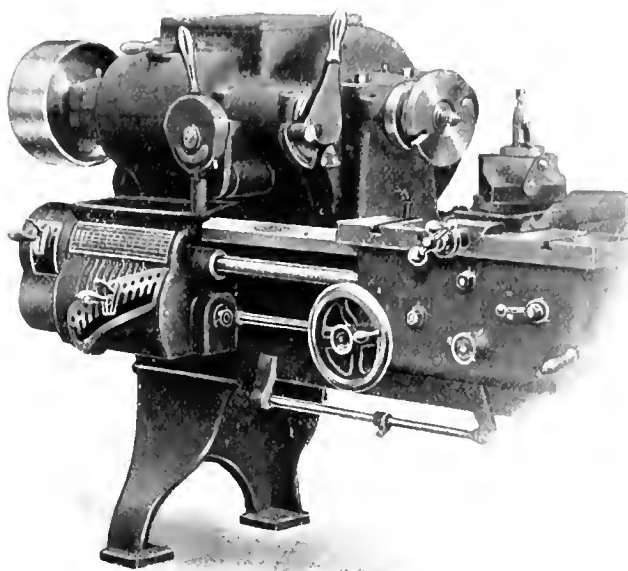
Hendey-Norton 20-inch Lathe with Geared Head.
